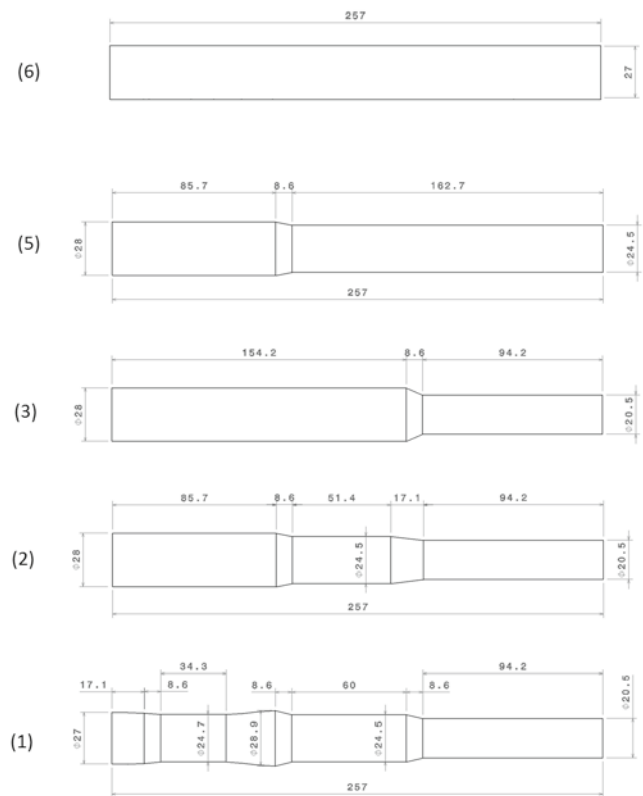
Cutting the workpiece with a finite number of parallel planes perpendicular to its longitudinal direction
